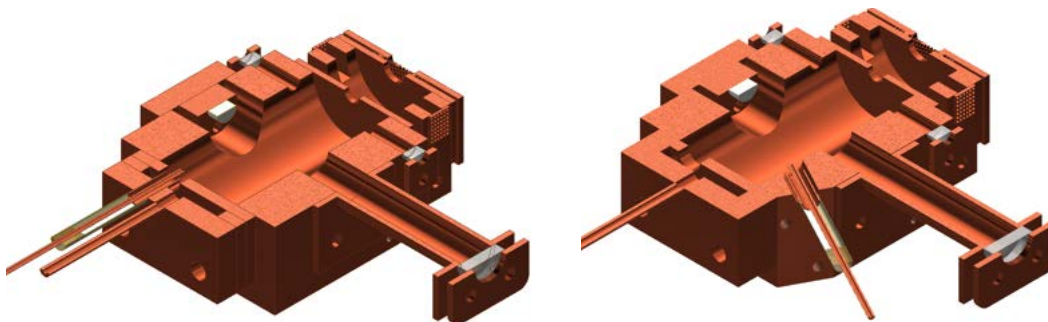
Buffer Gas cell designs used in this work. (left) Initial buffer gas cell design based on the buffer gas cell used to laser cool CaF [14]. In this configuration the hot capillary enters the back of the buffer gas cell. (right) buffer gas cell design used after moving cell away from the 4 K surface see Figure 4.15. Here the hot capillary is directed directly at the calcium target. No significant difference in performance was noted between these cell designs.
